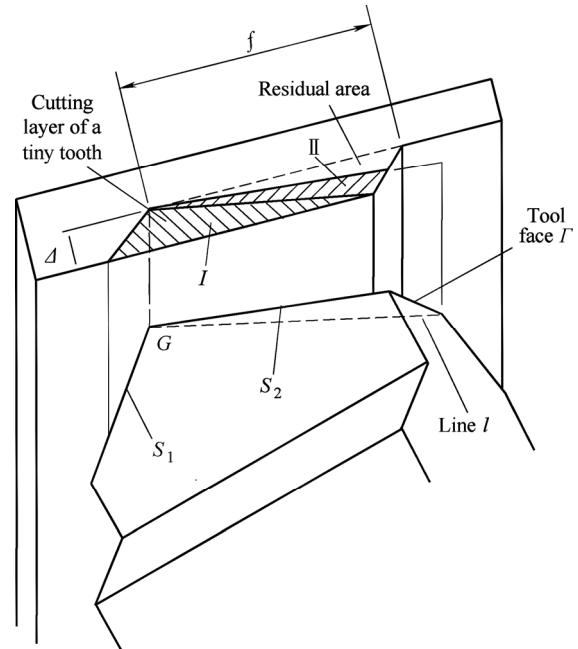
Cutting layer of a tiny tooth of multi-tooth tool
